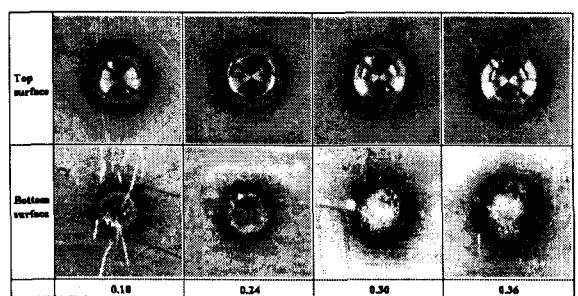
External shape with pin insertion depth after spot friction welding
